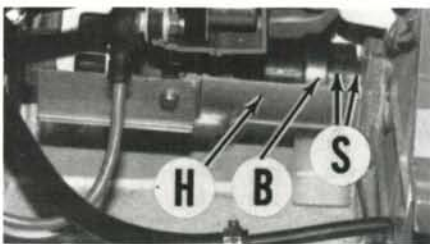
Cutaway view showing a typical intermediate housing setup. After removing intermediate housing assembly as outlined in text, remove drive shaft drive flange and front cover. Tap intermediate housing (H) off rear of drive shaft using a soft-faced mallet. Bearing (B) is located on drive shaft at front and rear of intermediate housing. Two seals (S) are located in rear of intermediate housing and two seals are located in front cover. An "O" ring is used around outside of front cover. A shim may be used between front cover and front drive shaft bearing.
